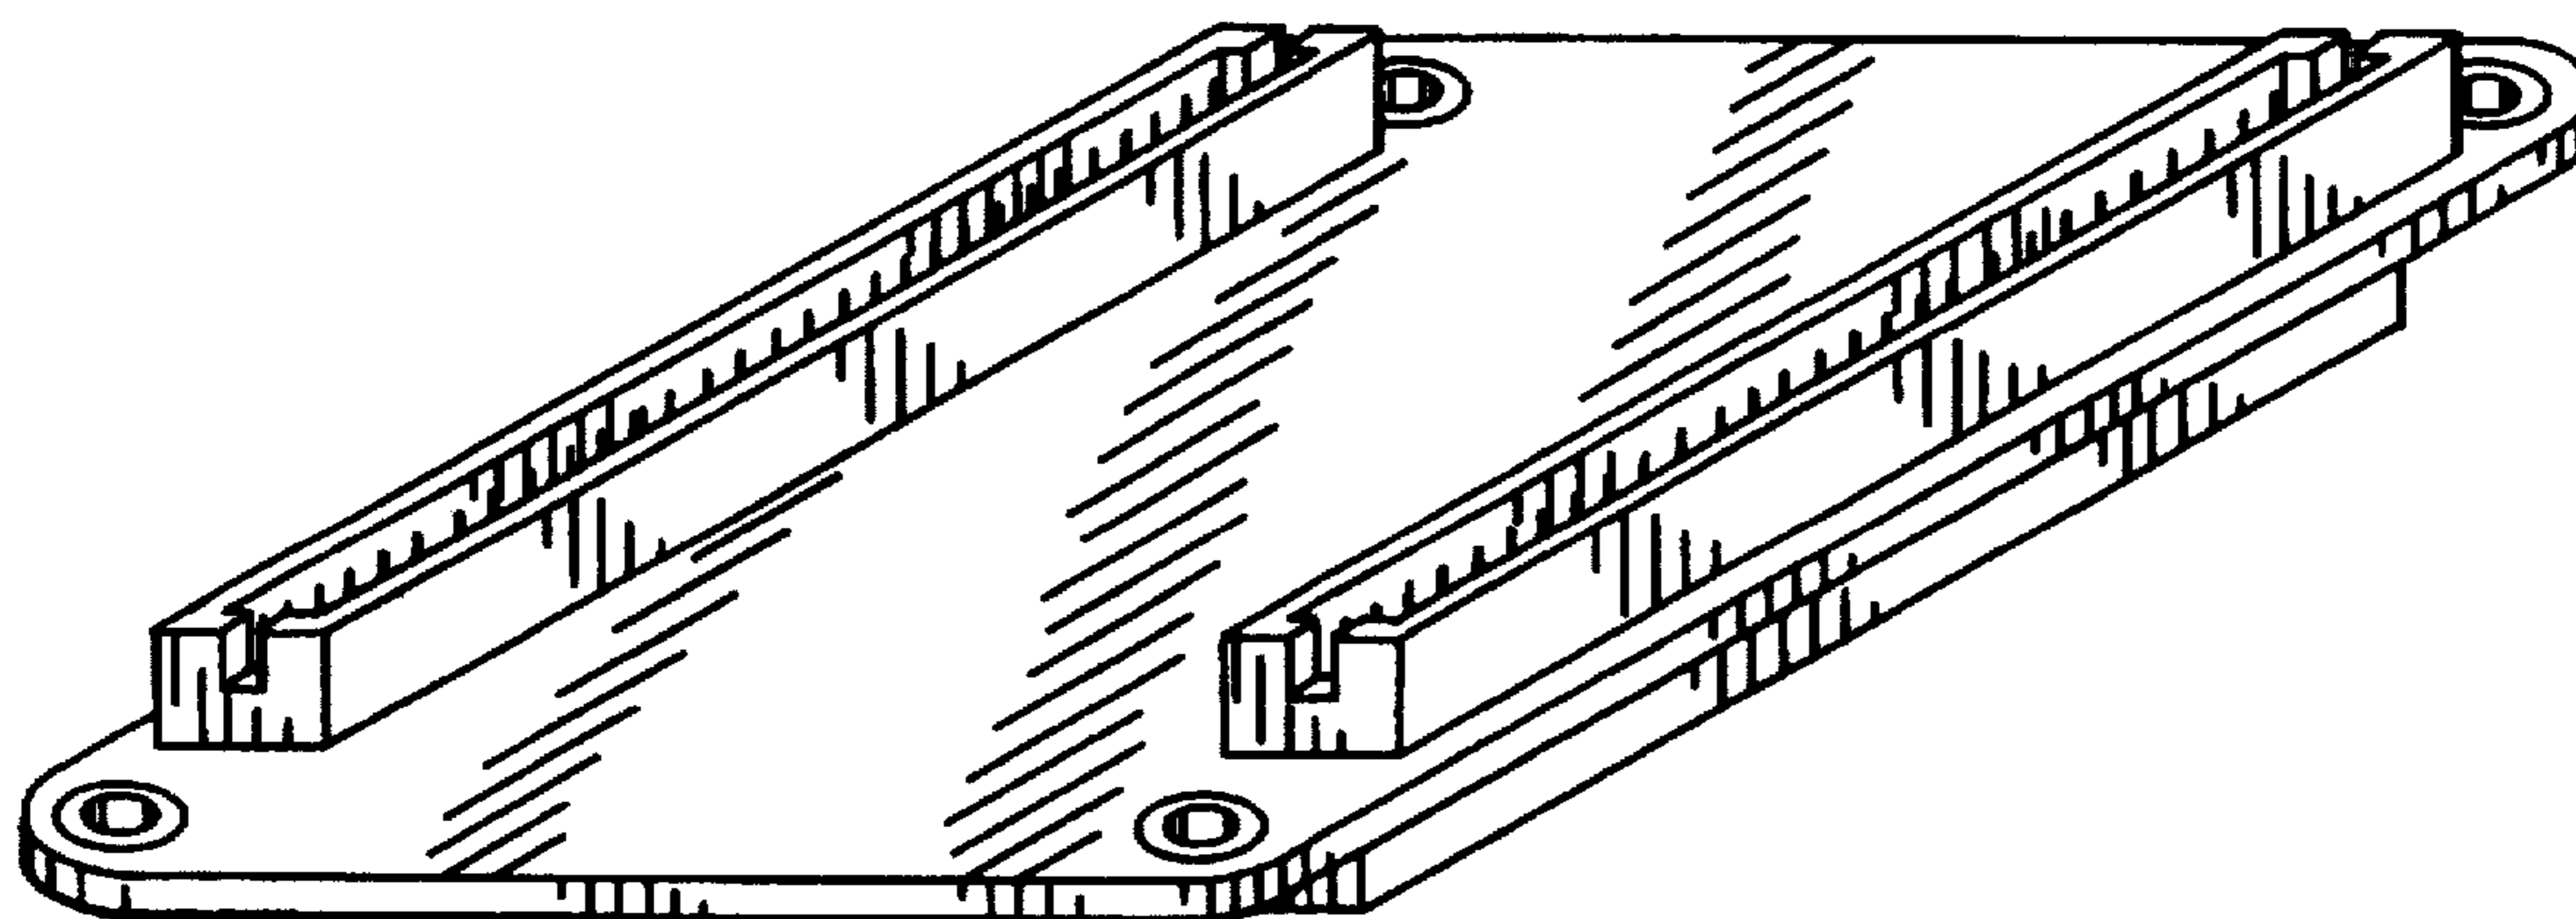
is a bottom, right side, isometric view of the bottom side of a circuit board module showing my new design with a selection of devices mounted to the board of the inventive design;
